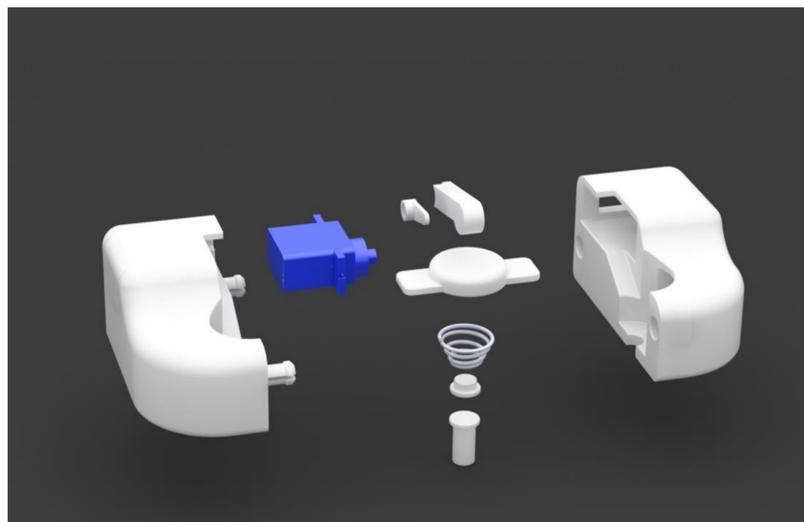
Exploded view of the button with the servo motor, spring mechanism
